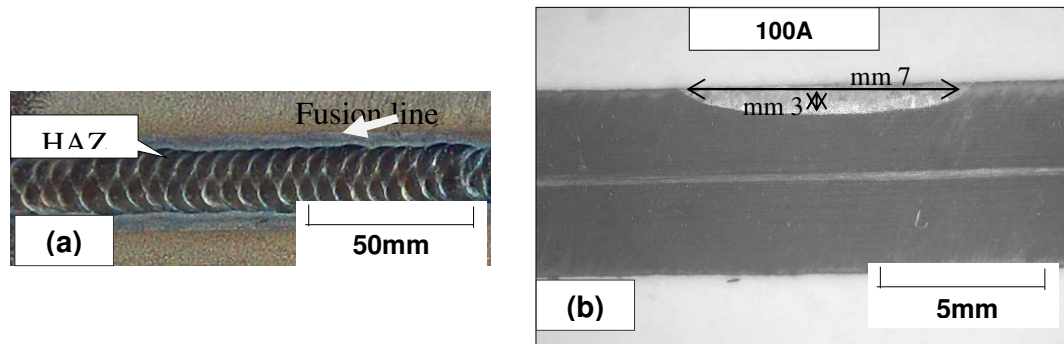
Photograph of face side (a) and macrograph of a cross section (b) of GTA bead-on-plate autogeneous weld made using 100A welding current, 13V welding voltage, 140mm/min welding speed, 15 l/min argon flow rate, 0.05% oxygen content in back purging.
